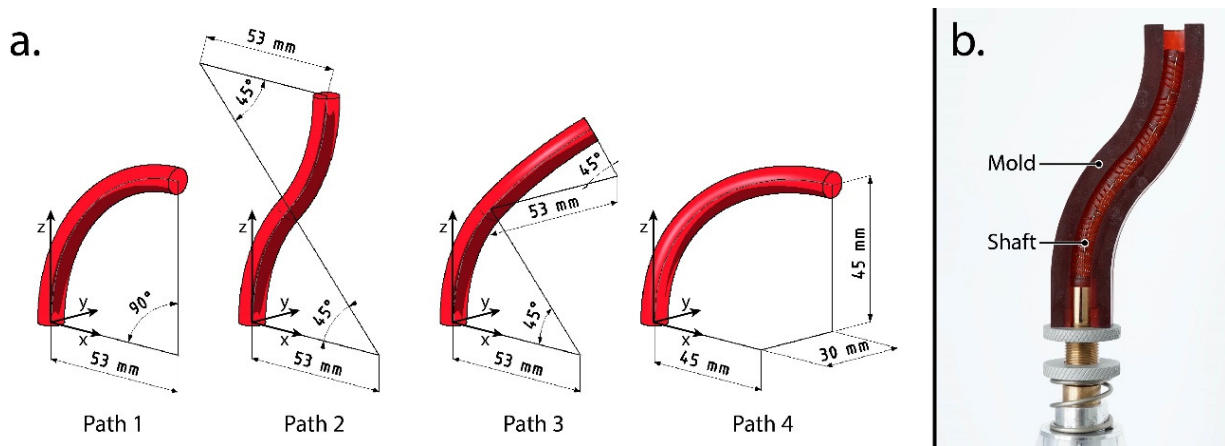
Reverse engineering tracks based on molds of the path a) Paths 1 to 4. b) 7 Segment shaft inserted in the mold of Path 2.
